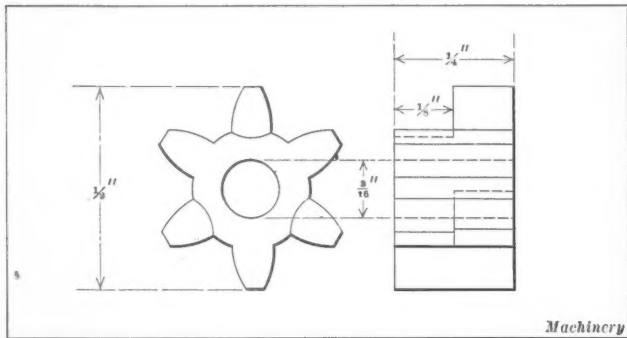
Intermittent Gear machined by Tool shown in Fig. 1
